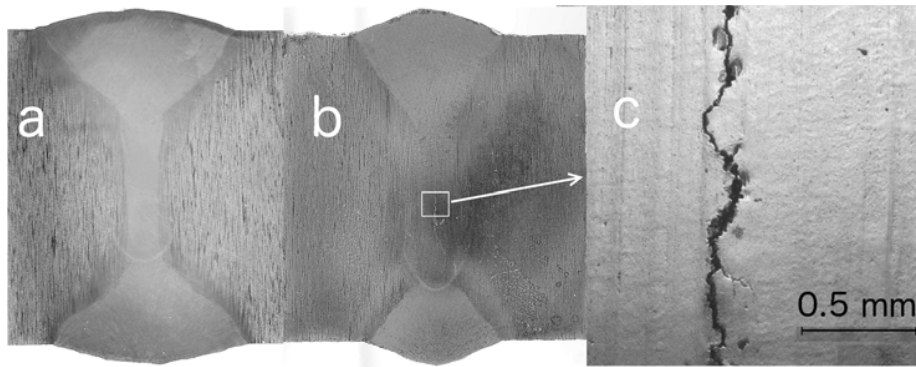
(a) An example of a flawless weld M1, and (b) the weld with the largest solidification crack Lc. (c) Partial microscopic view of the crack.
